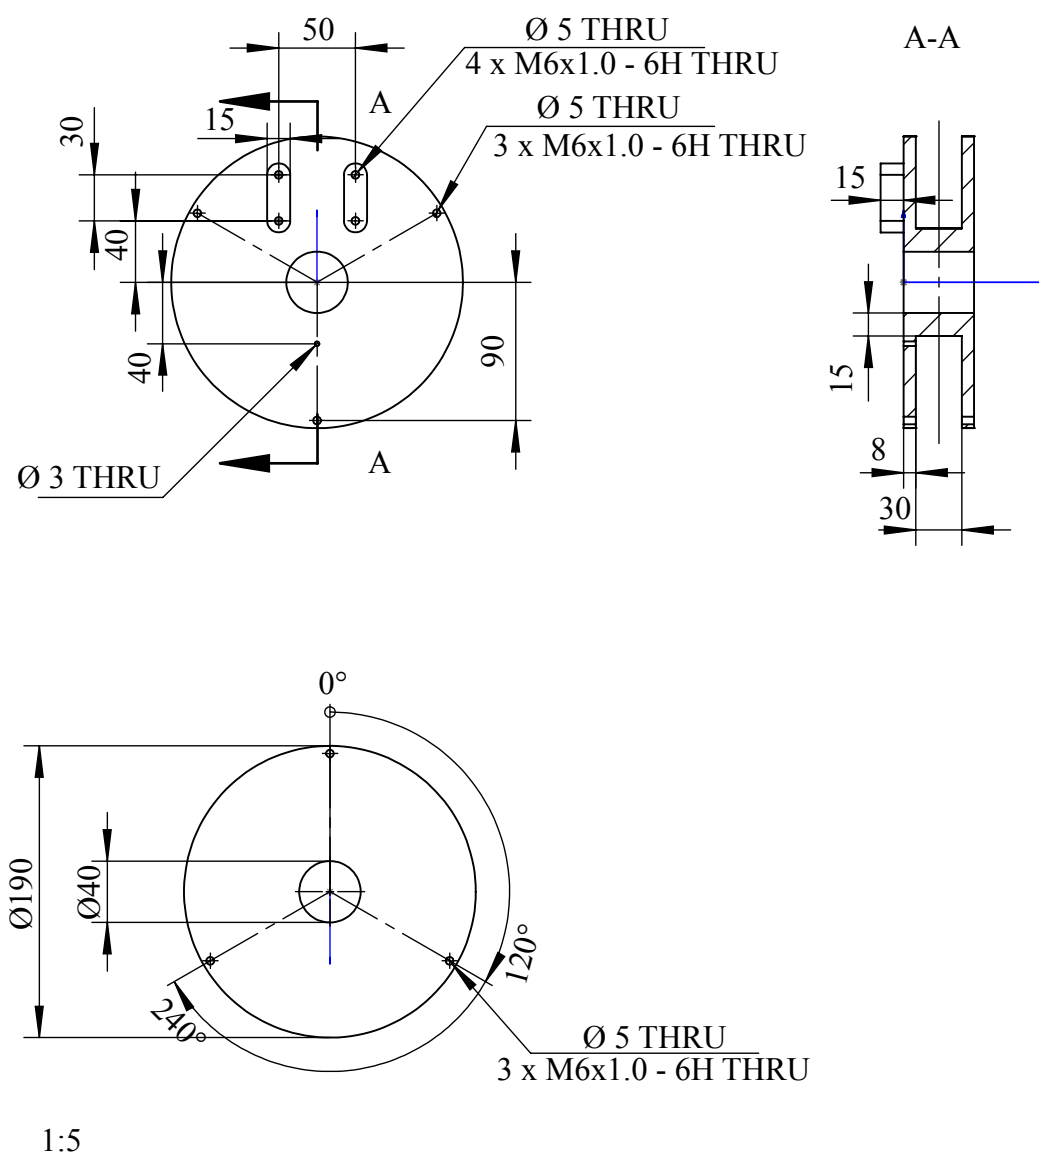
Test coil former production measurements drawn by Mingjiamei Zhang.
